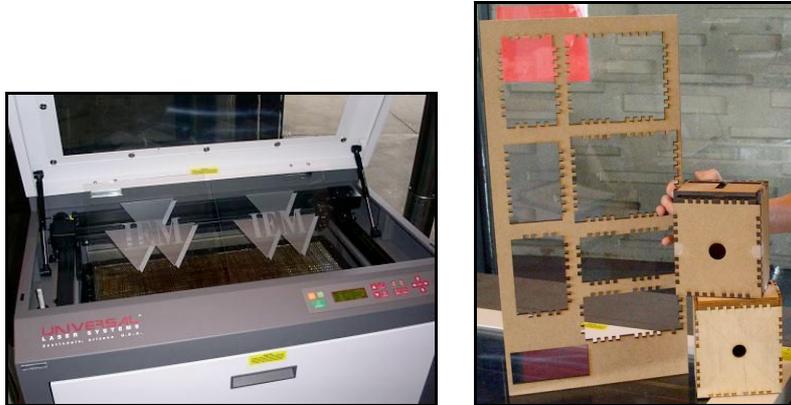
The laser cutting and engraving machine (left) and cut products (right)
